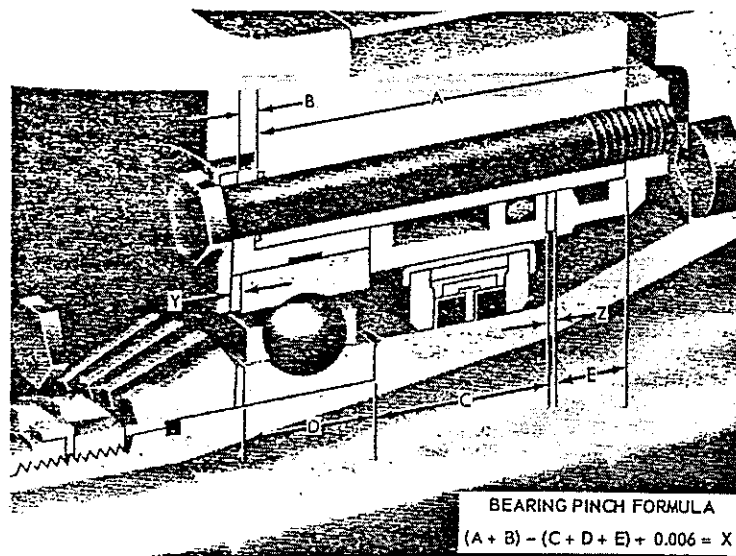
Cutaway View of Number One Main Bearing Pinch Fit
